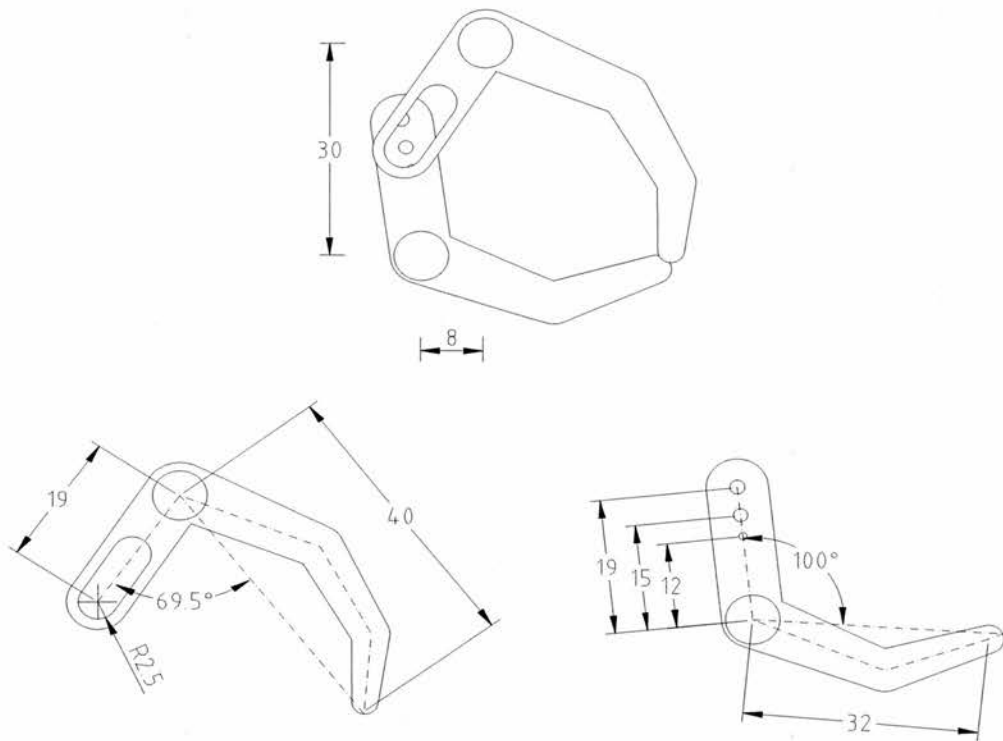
Dimensions of the hand mechanism (dimensions in mm).
